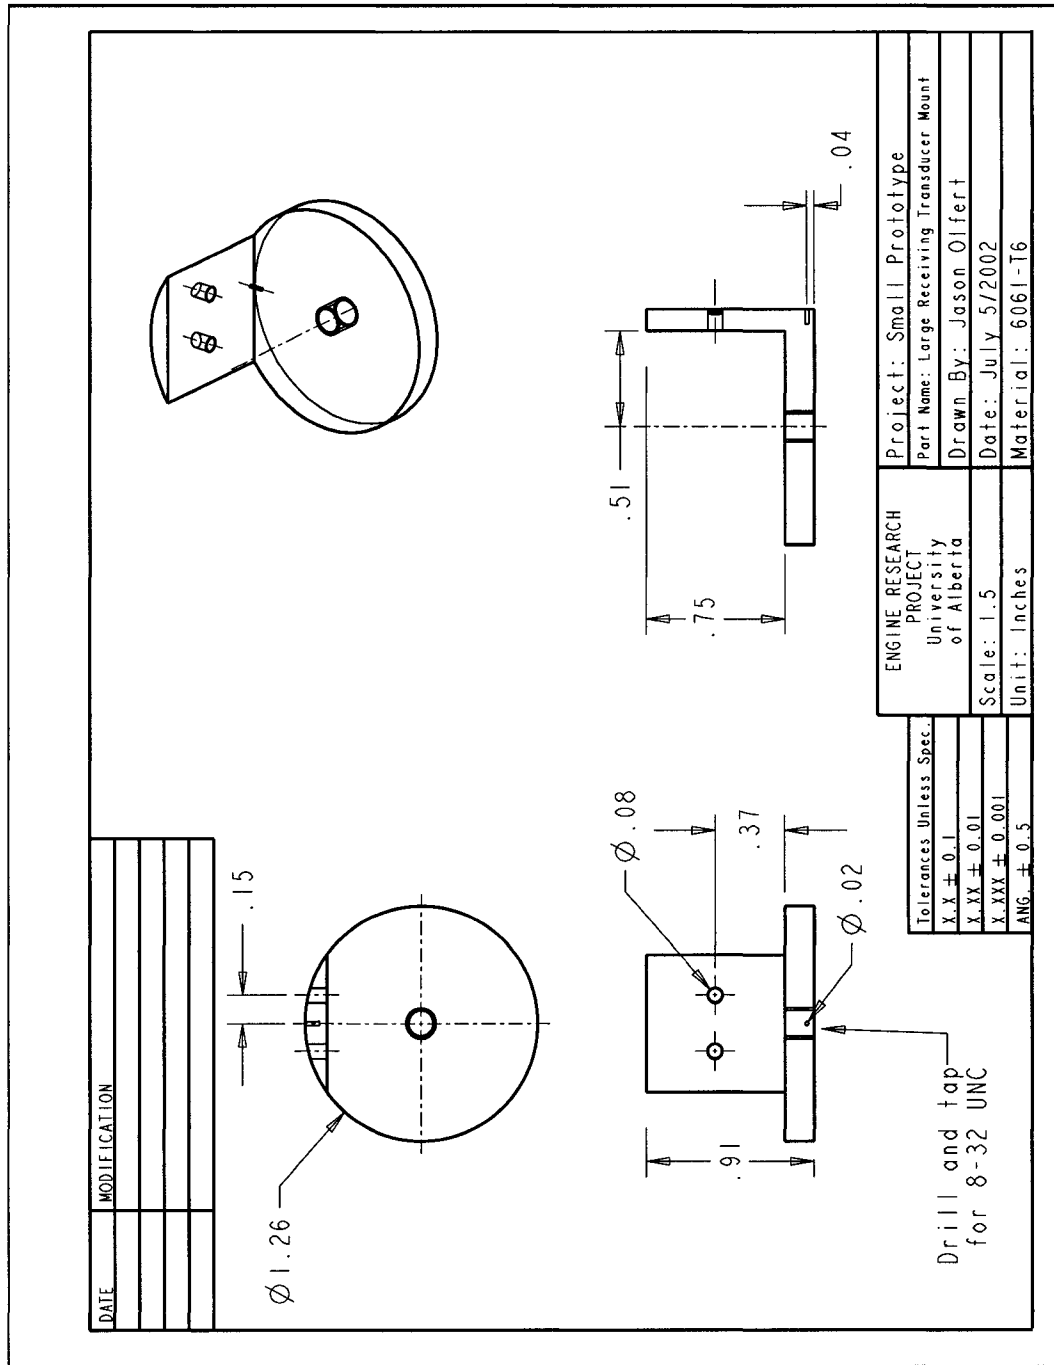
Drawing of Large Receiving Transducer Mount of Small Prototype
